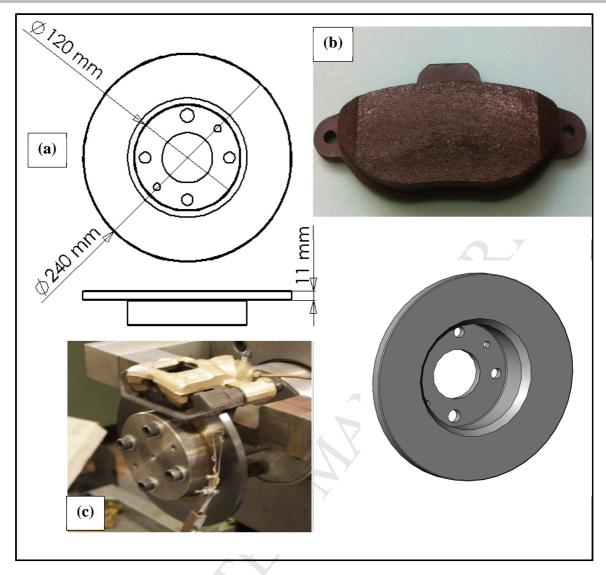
Full scale disc and pad with thermocouple position: (a) disc geometry, (b) brake pad, and (c) brake assembly mounted on dynamometer.
